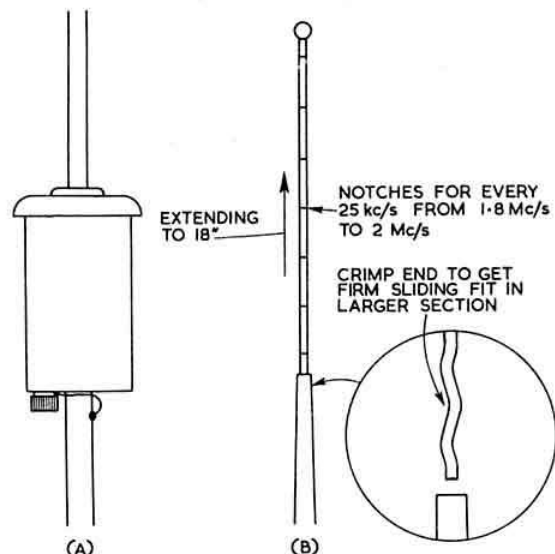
(a) The appearance of the loading coil when assembled. (b) The adjustable top section of the aerial with (inset) the crimped end which slides into the main rod.
